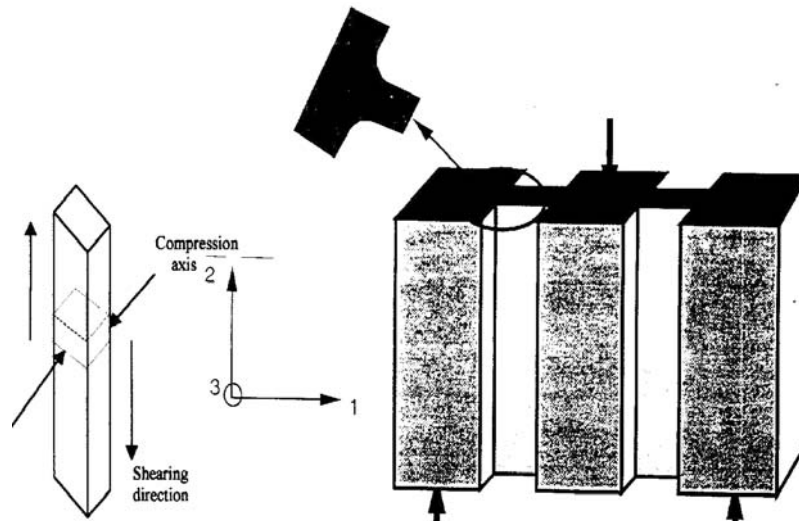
Schematic of sample used in simple shear testing and the compression sample (used in deformation path change test) machined out of the gauge section showing the compression axis.
